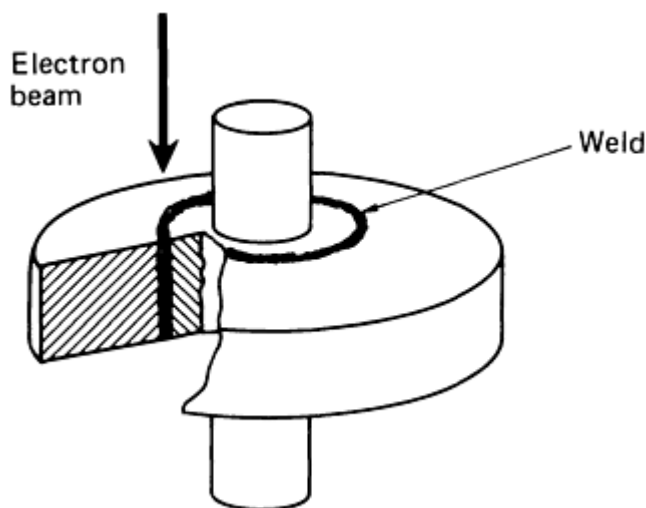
CUTAWAY VIEW SHOWING LOCATION AND PENETRATION OF A CIRCULAR ELECTRON-BEAM WELD JOINING A DISK-SHAPED COMPONENT TO A SHAFT
